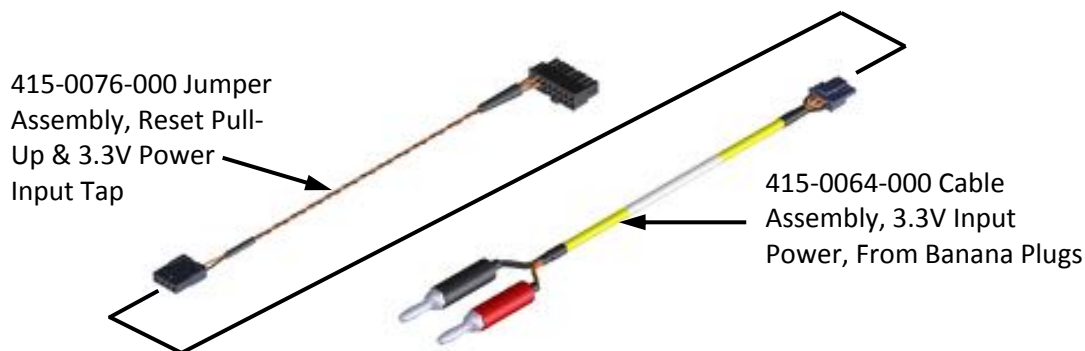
8639-TPA-R Universal TPA Power Cable and Jumper Cable Assemblies
